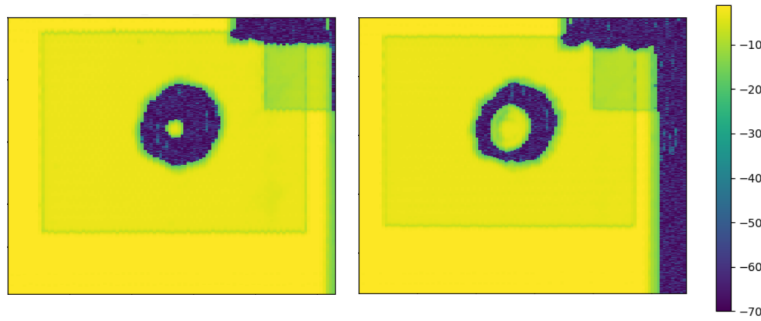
C-scans of specimen WF-600N-3.5sec. Left: before welding. Right: after welding
